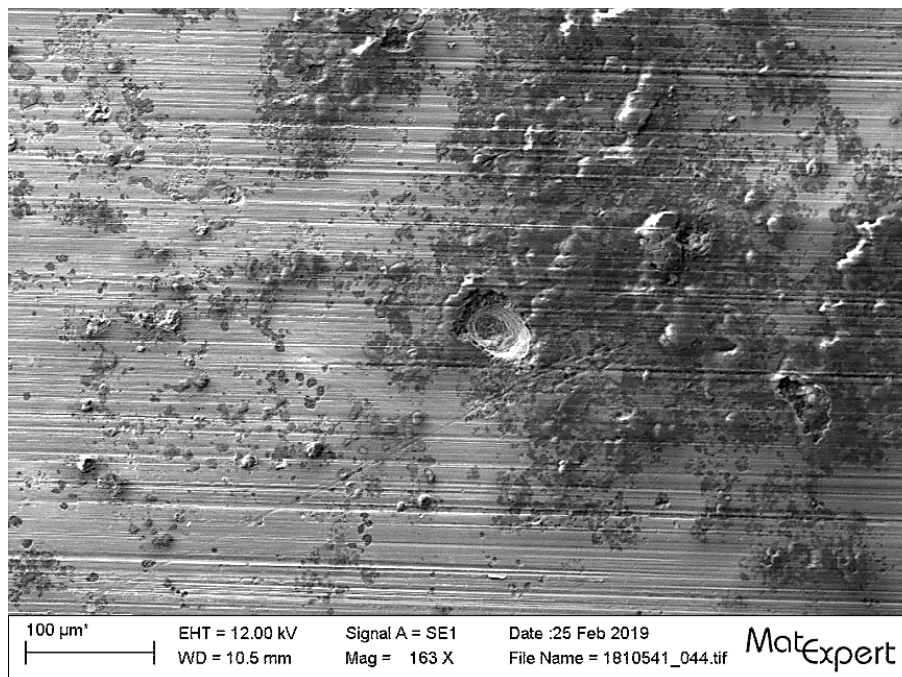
Close-up of the bore of cylinder 1 with two-layer thermal spray coating. Number (1) is the bond coat. Number (2) is the top coat, which is partially open-pored.
